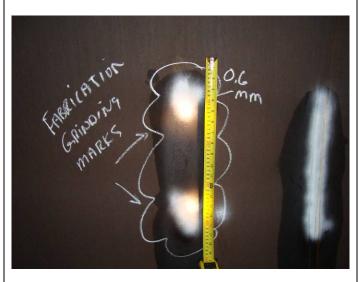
Mechanical marks on interior shell looking West between #7 and #8 circ welds
